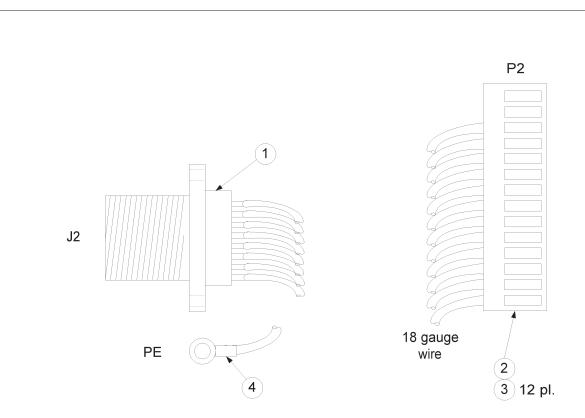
DRIVE CONNECTOR HARNESS EXPLODED VIEW
